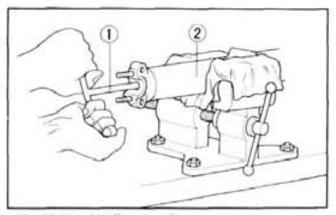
(1) Allen head wrench (2) Front fork bottom case
